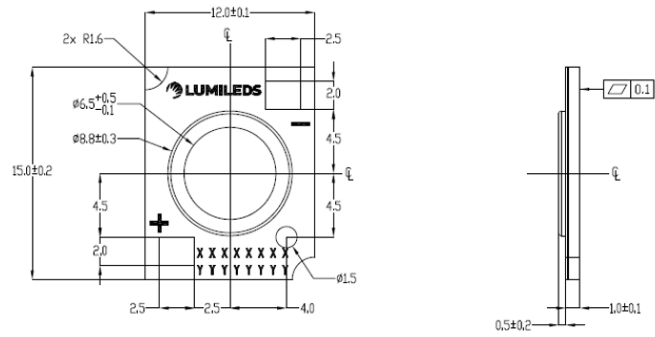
Mechanical dimensions for L2C5-xxxxxL02FH600 (LES 6.5 mm)
